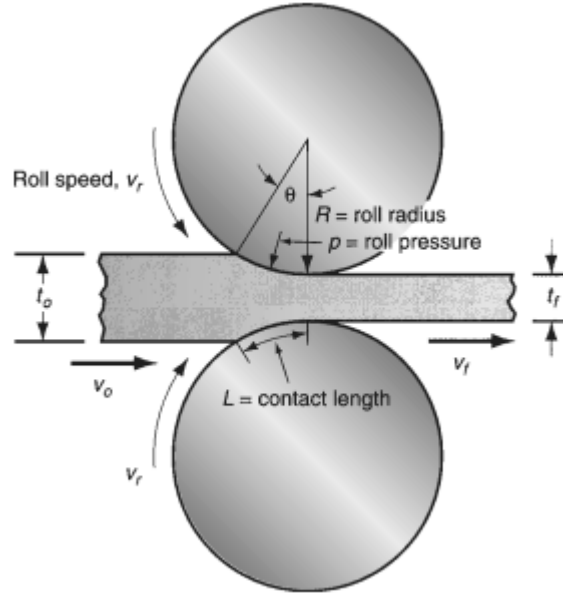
Schematic of a workpiece undergoing cold rolling mill [36]
